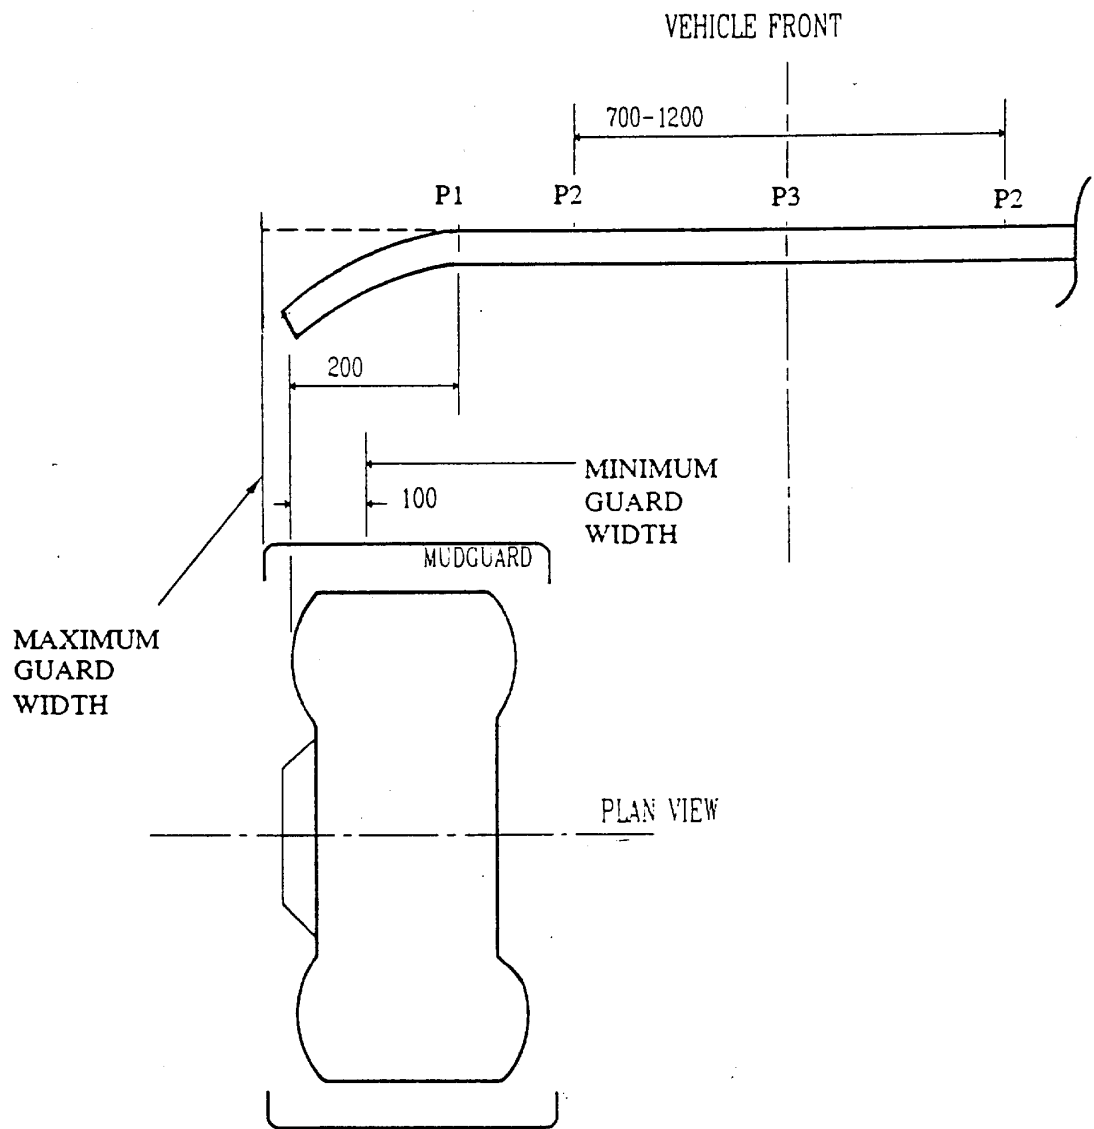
Top view of schematic FUPS including measurements. (from UN ECE-R93 Part III [3])
